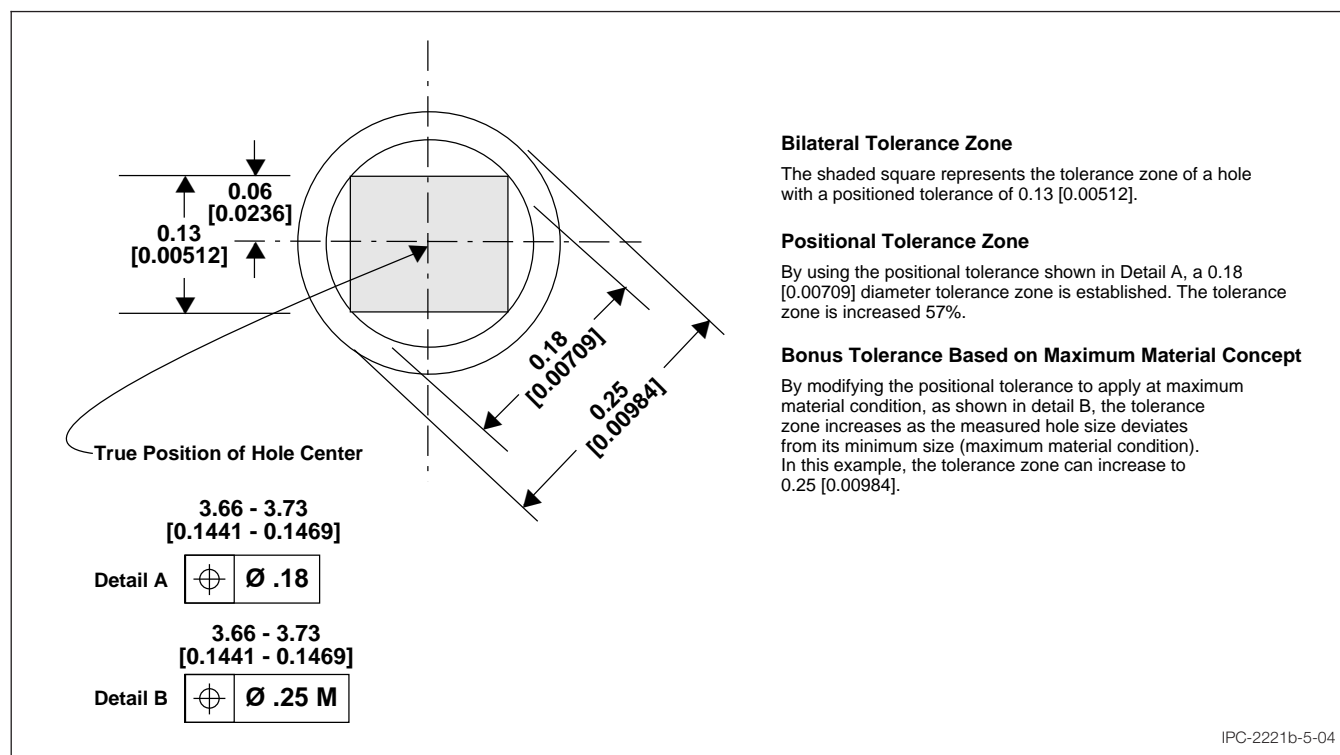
Advantages of Positional Tolerance Over Bilateral Tolerance, mm [in]
